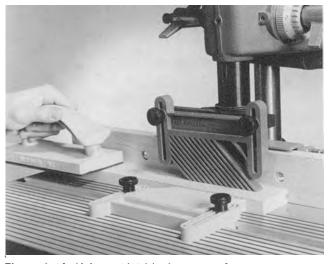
Using a 1/4" blank cutter to form a groove exactly centered in the edge of the stock.
